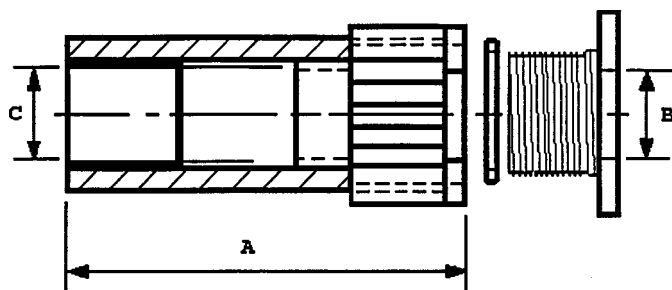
Type I—Single-Legged Standard Cable Entry Seals
